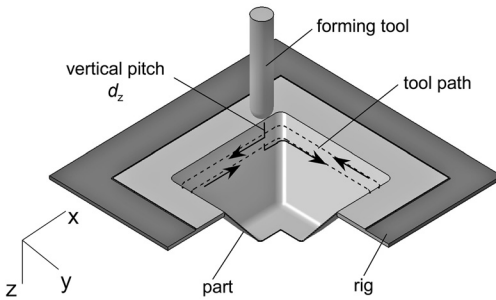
Tool path and tool pitch for a sample geometry. Source: Ref 13.2
